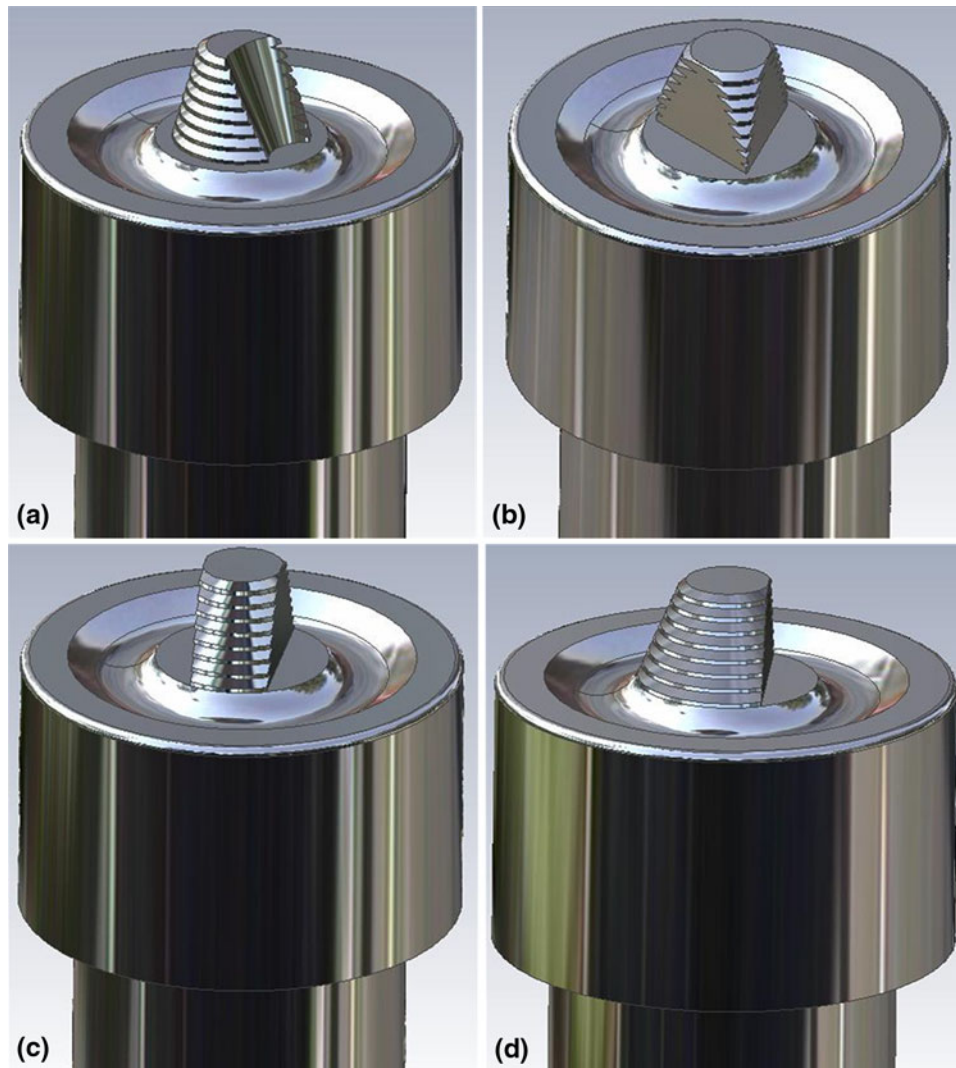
Additional tool geometries employed to validate the RSM for tensile strength of the welds. (a) Custom Tool 4; (b) SC Tool 1; (c) SC Tool 2; (d) SC Tool 3
